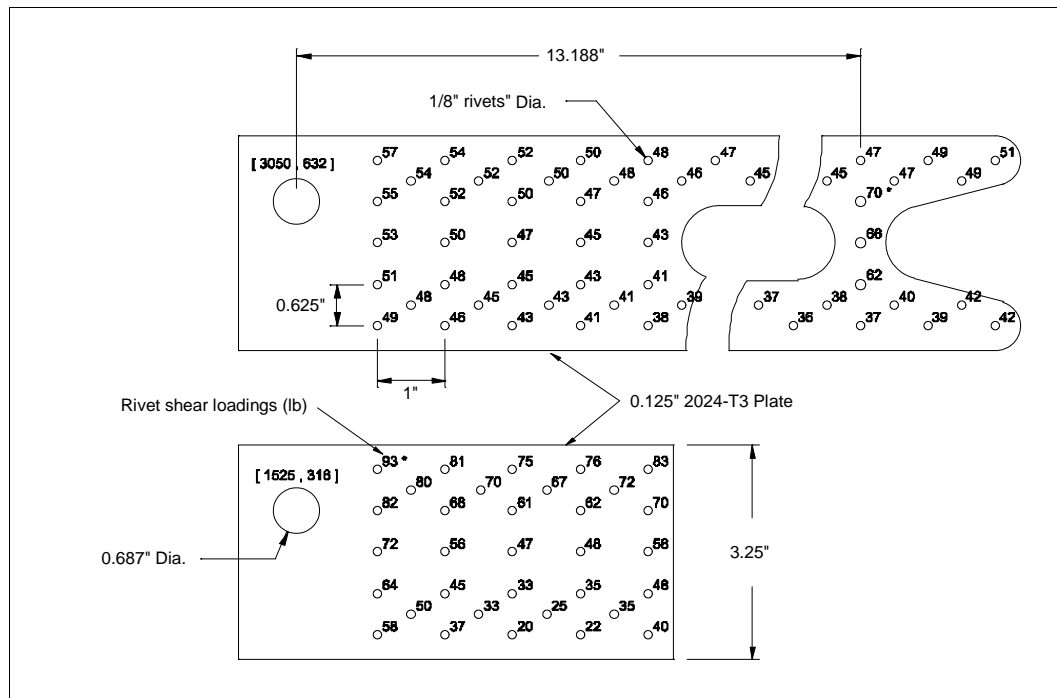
Inboard Wing Panel, Aft Spar Attachment Fitting Rivet Loads.
